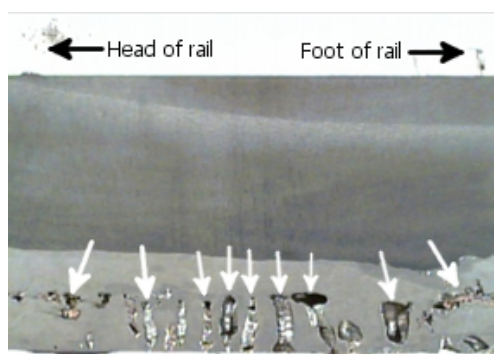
Rail weld joint fracture, arrowhead notation - defects
